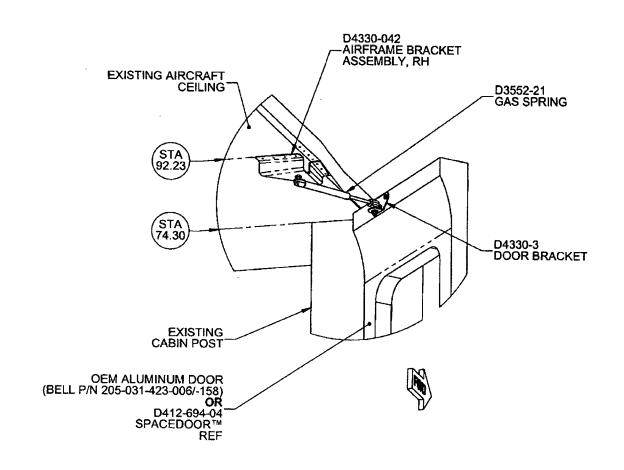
INSTALLATION DETAIL (RH Installation Shown, LH Opposite)
